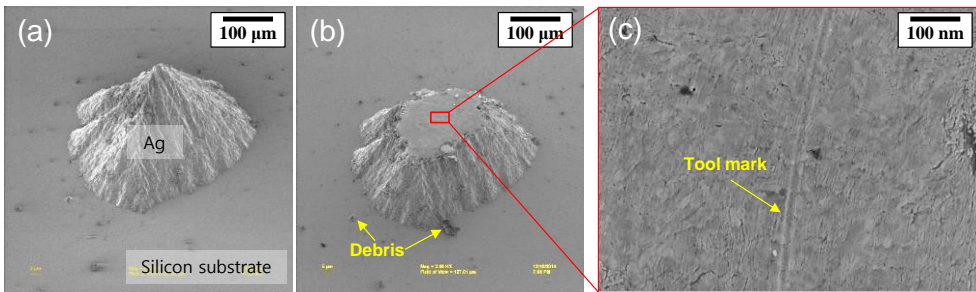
Surface morphology after hybrid process; (a) before face milling, (b) after face milling, and (c) high magnification surface after machining with tool mark
